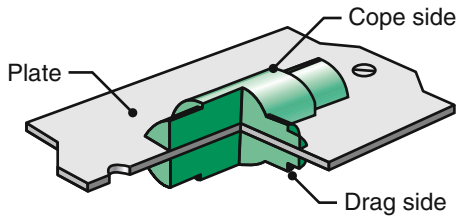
A typical metal match-plate pattern used in sand casting.
